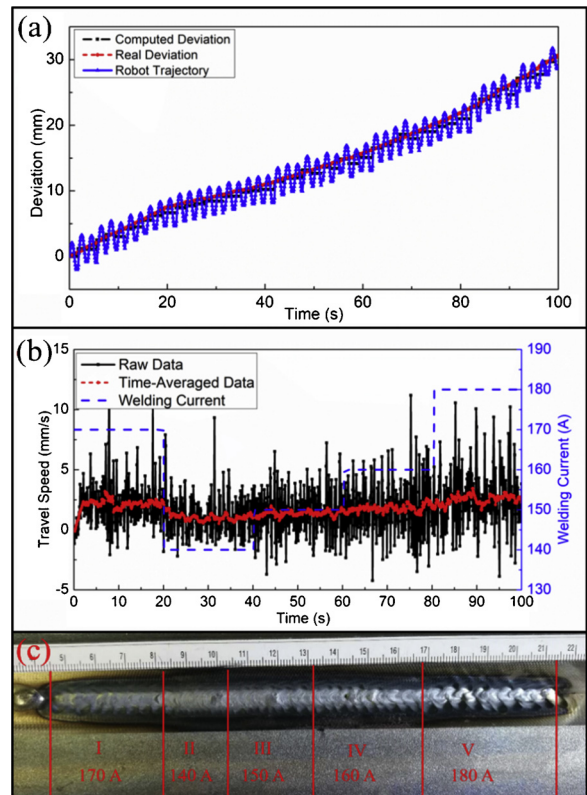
Human-robot collaborative welding (a) weaving trajectory (b) travel speed (c) welded workpiece.
